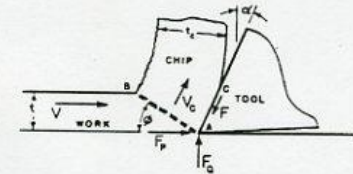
CONDITIONS AT POINT OF CUTTING TOOL DURING CONTINUOUS CUTTING. WIDTH OF CUT ALONG CUTTING EDGE = b
